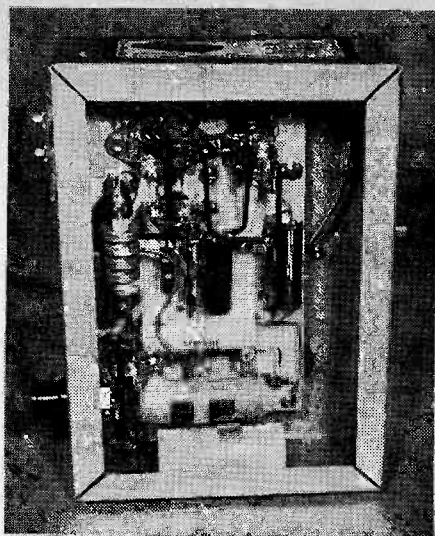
(above) Only soldering needed inside deep chassis aprons are for input, output and power.
